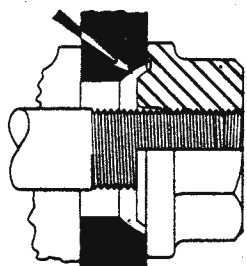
Aluminum Wheel Corrosion or Flaking
